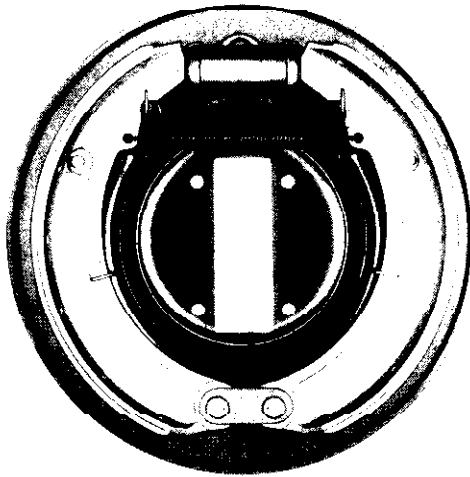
Brake Shoe Assembly Front—J-15 Models
